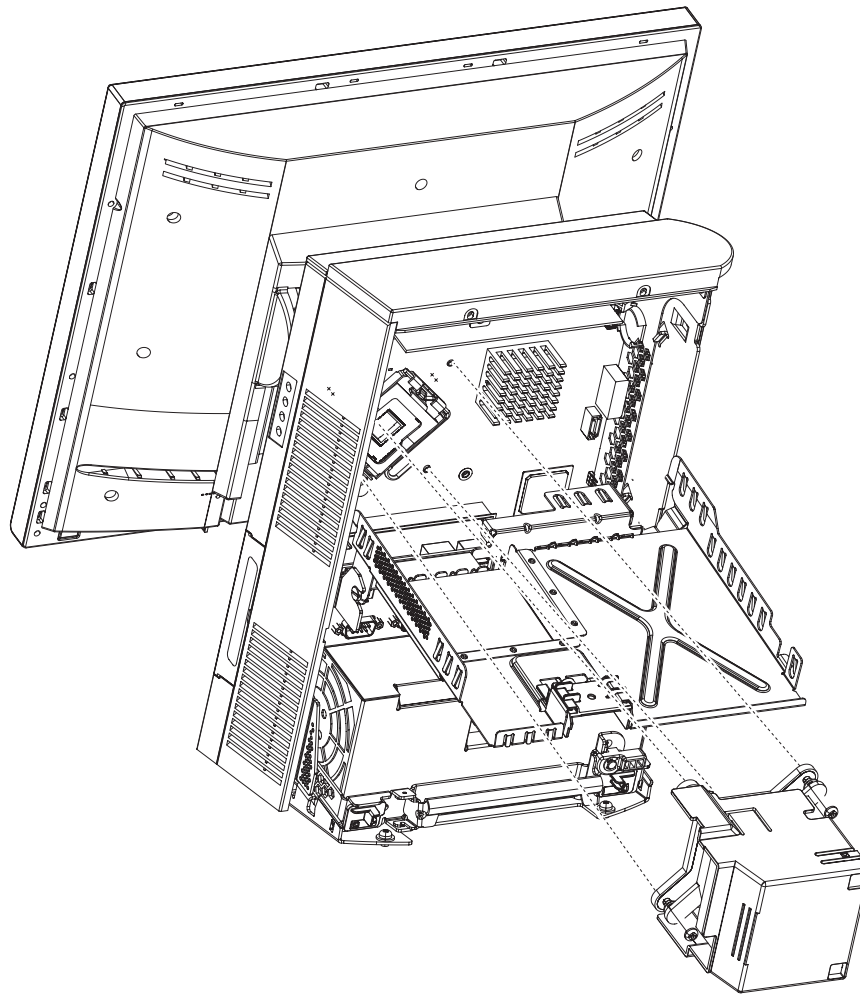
Removing the processor fan/ heatsink assembly. The placement of the unit in the top view is for illustrative purposes only.
